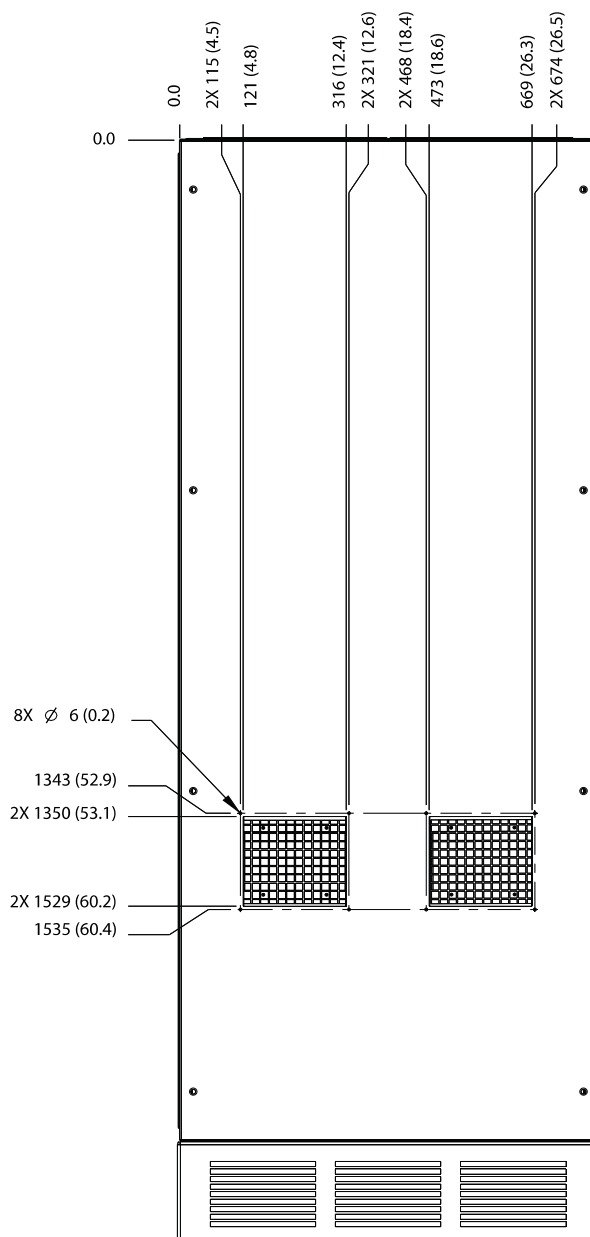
Vent Dimensions for the Back Cover Panel
